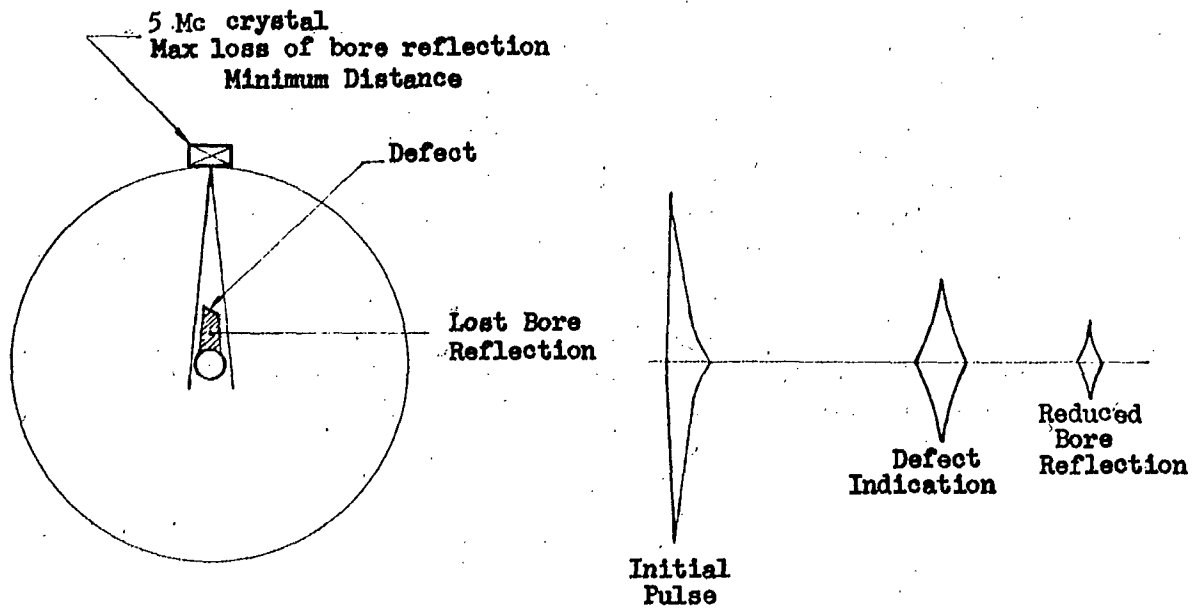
Step (b) in ultrasonic pinpointing to locate rotor defects.
